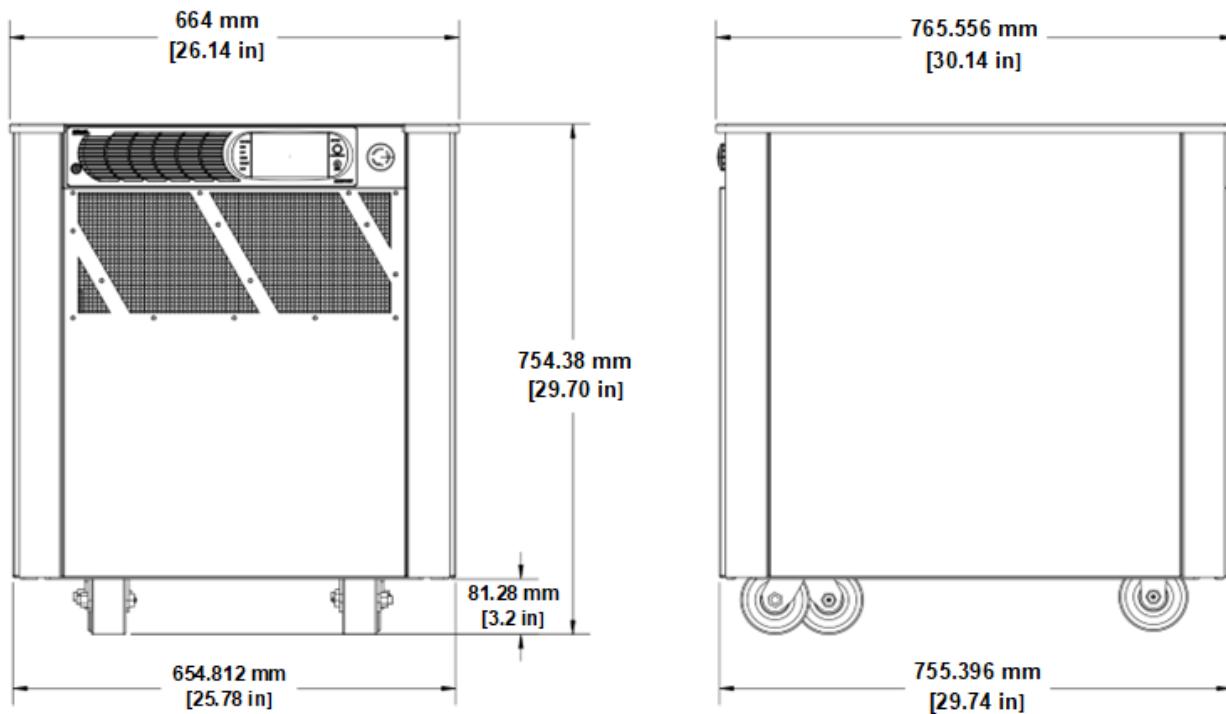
Air Inlet and Air Outlet Location and Rare view Drawings for SQ/TA 0090 with Chill Door Assembly model
